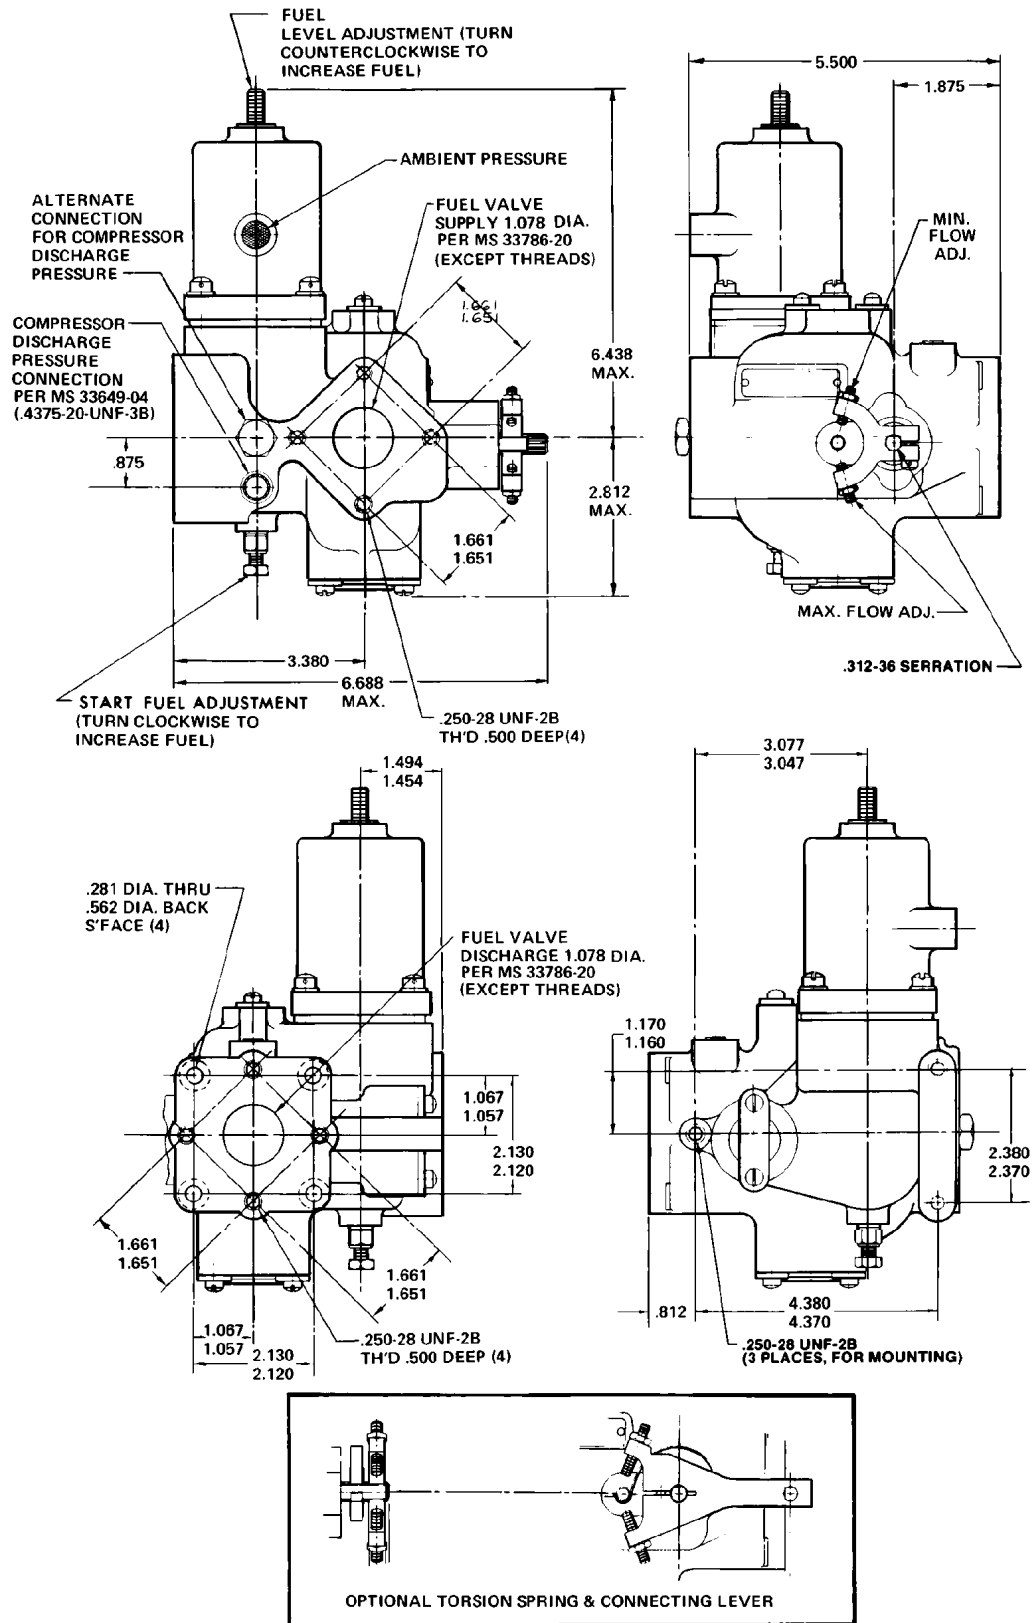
Outline Drawing, 1907 Gaseous Fuel Valve Limiter
